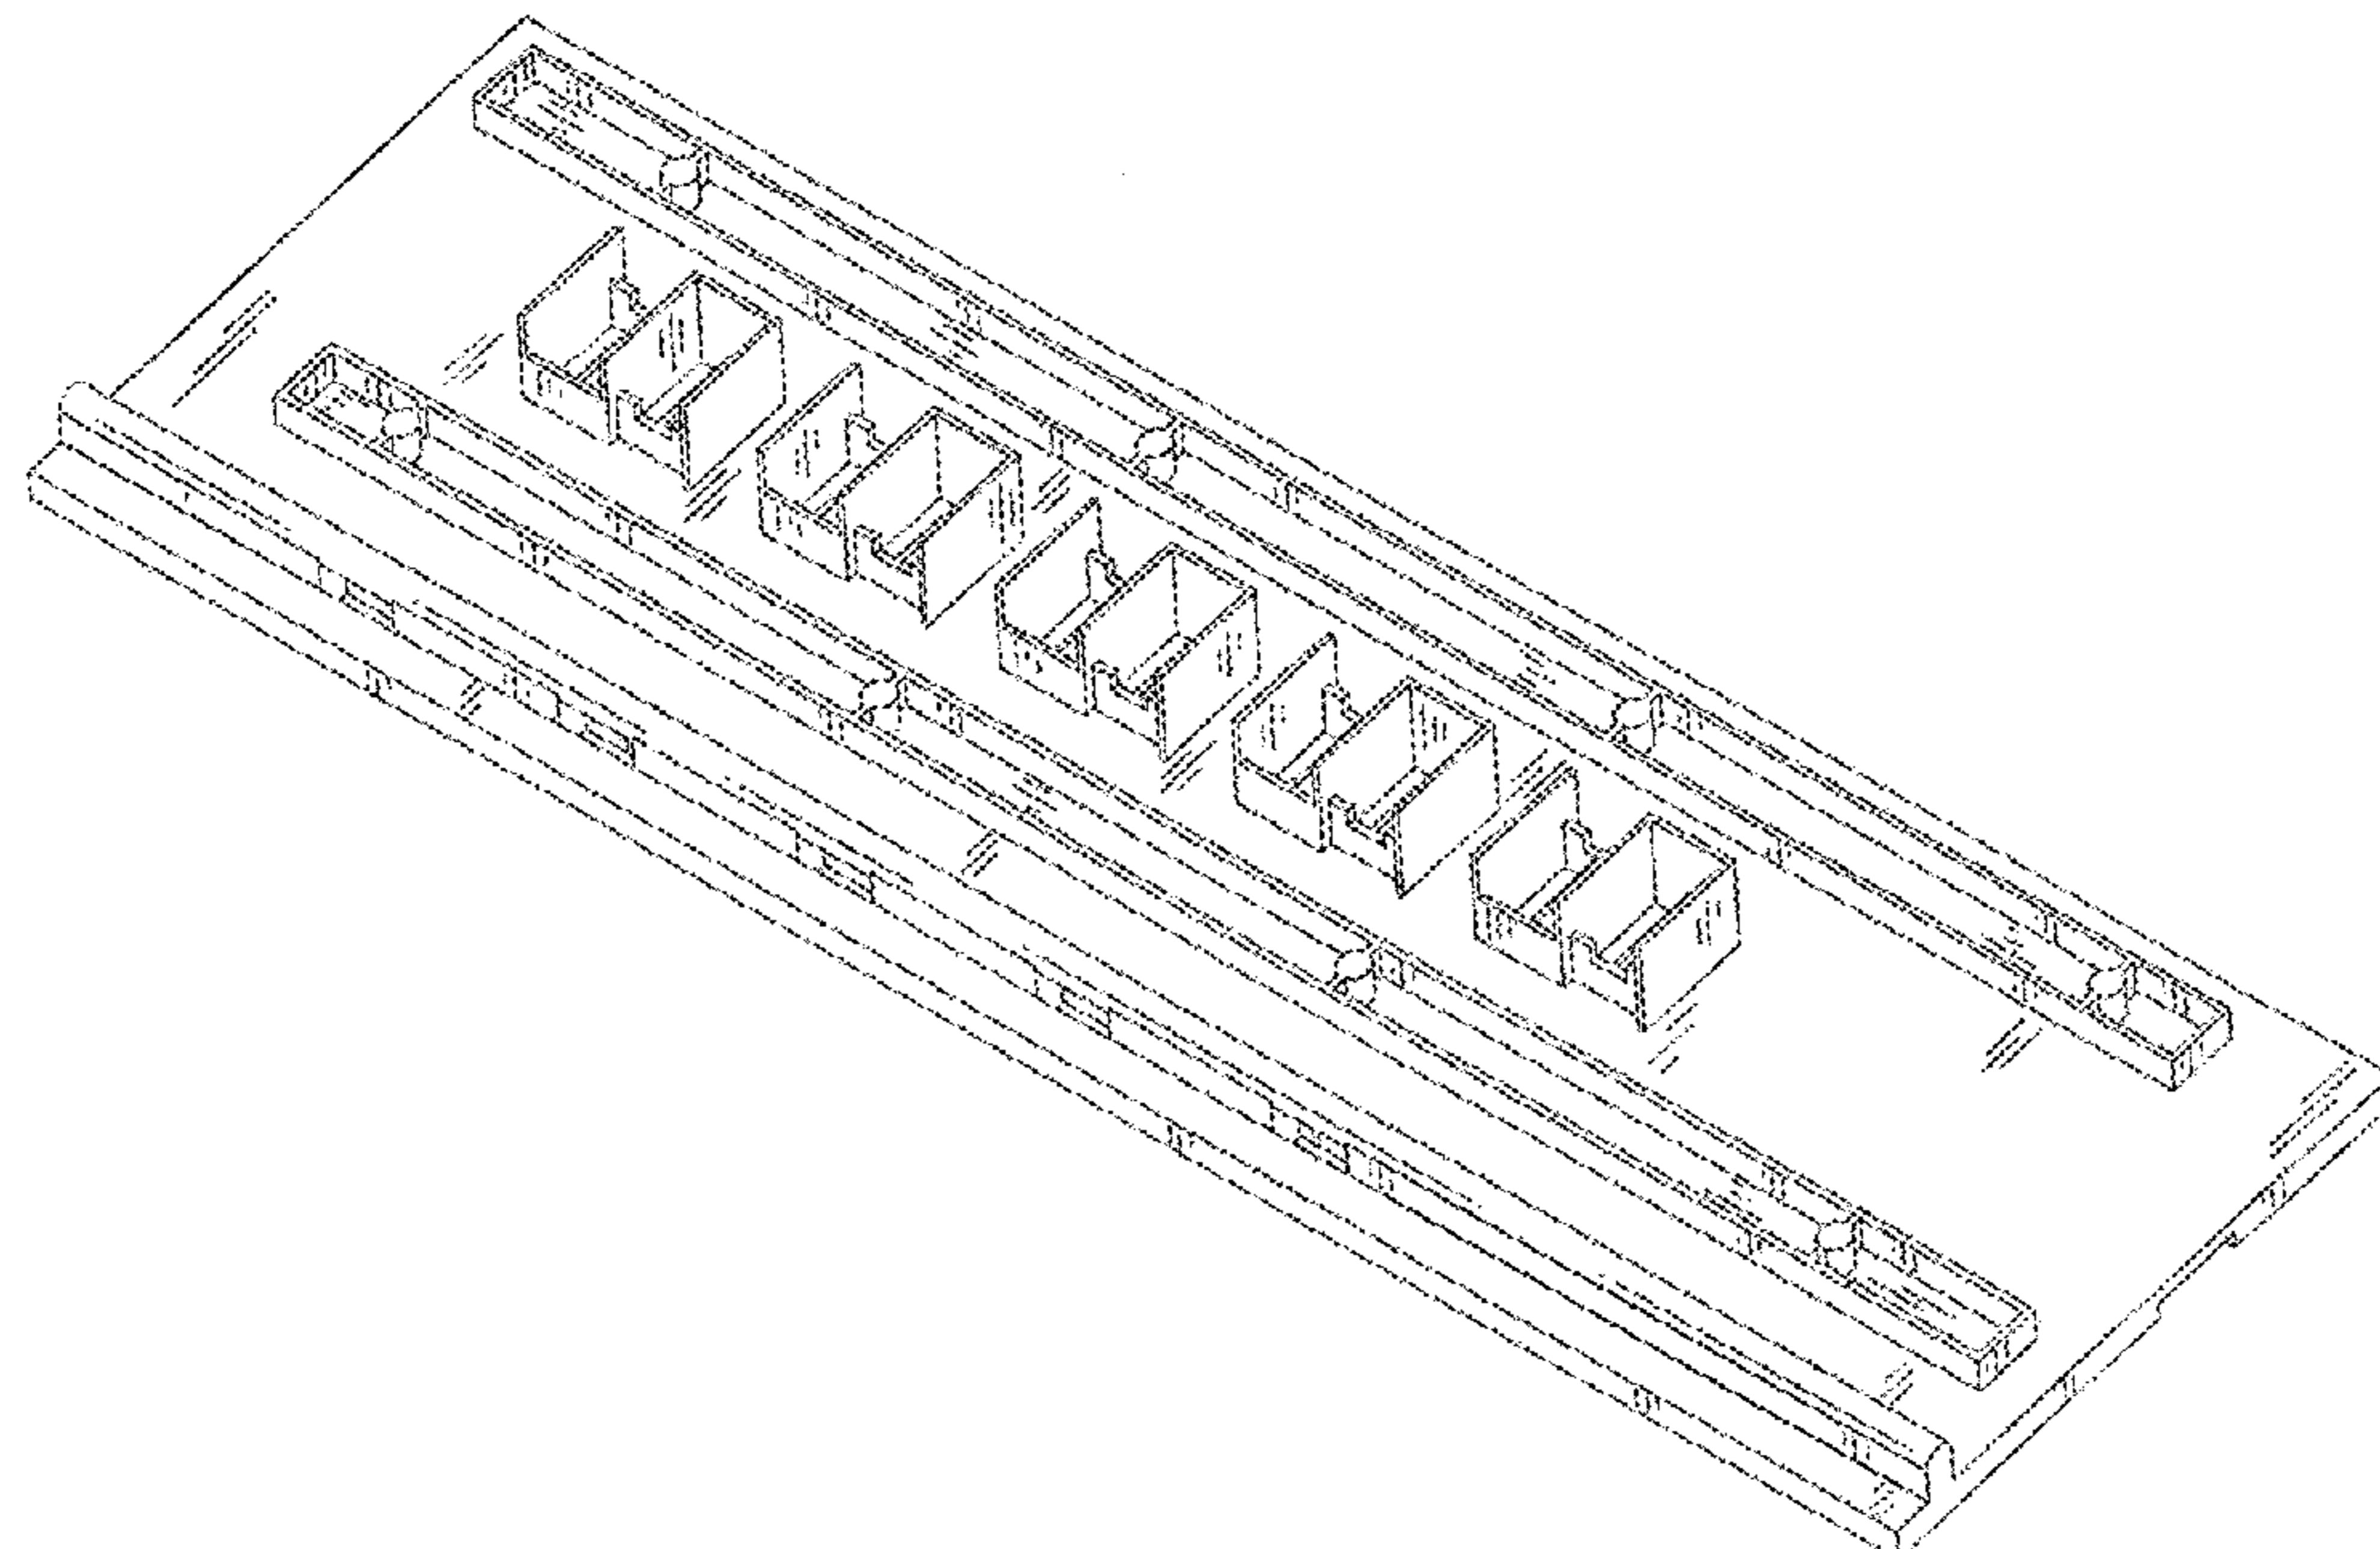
is a bottom view showing the bottom of the circuit breaker board for a portable isolation power supply.
